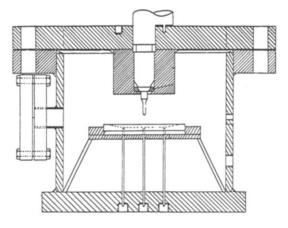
Pressure vessel and hot plate assembly cross-section.
